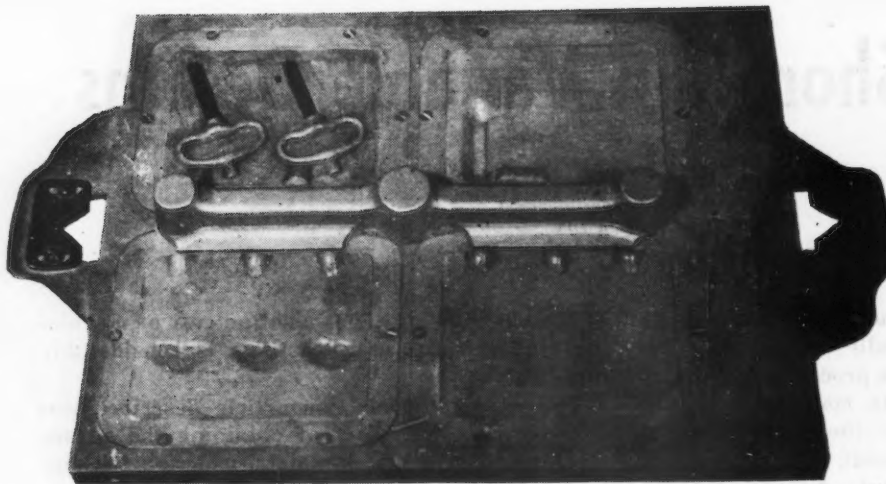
Reverse side of Fig. 2. The master frame is issued is molders engaged on this short-run work and remains in his possession as part of the standard equipment of his machine.
